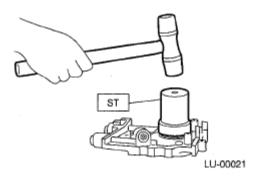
Identifying Oil Seal Courtesy of SUBARU OF AMERICA, INC.
